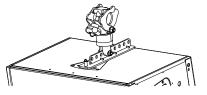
Q Flying adapter and Z5147 Rota clamp
